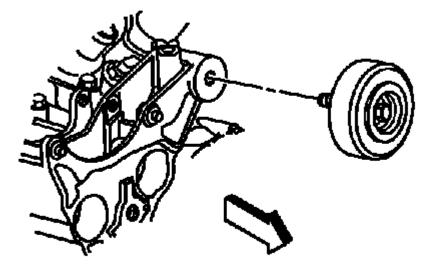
View Of Right Drive Belt Idler Pulley Courtesy of GENERAL MOTORS CORP.
